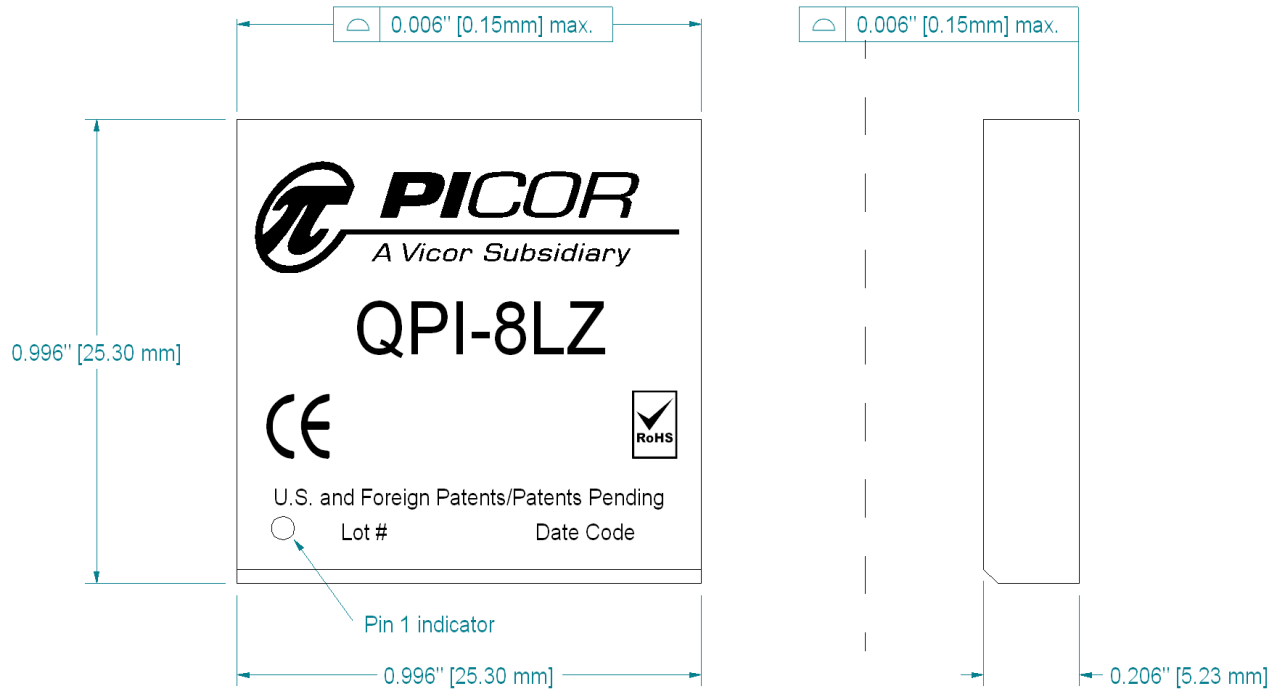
Lidded Package Dimensions, tolerance of ± 0.004 "
